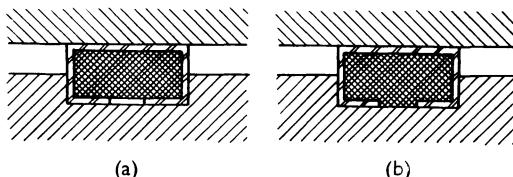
Rubber gasket, completely enclosed in metal foil: (a) uncom-pressed; (b) com-pressed
